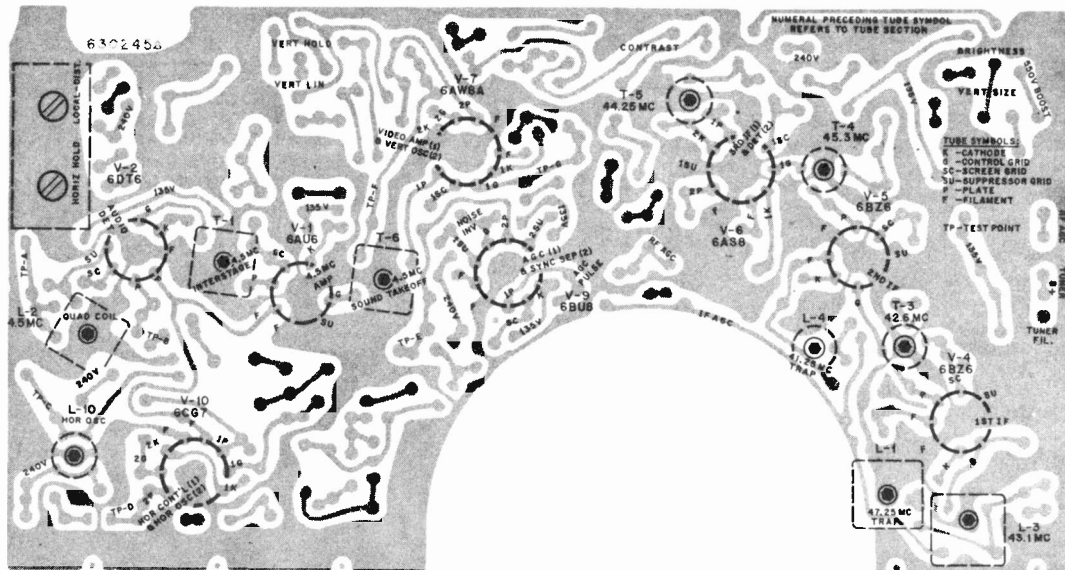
ETCHED PRINTED CIRCUIT BOARD, TOP VIEW
